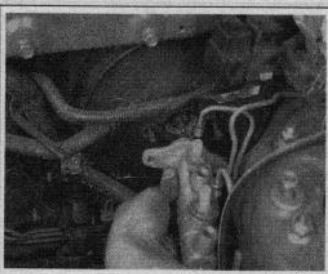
then remove the master cylinder assembly from the vehicle
